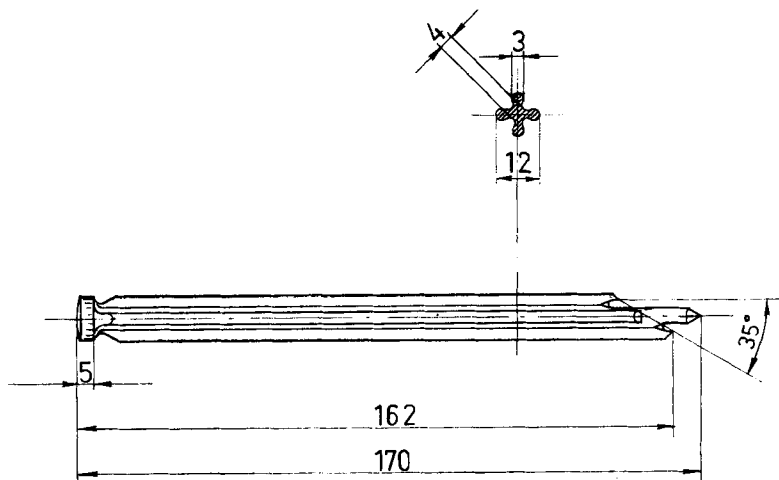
Construction drawing of experimental nail. The measurements are expressed in mm.
